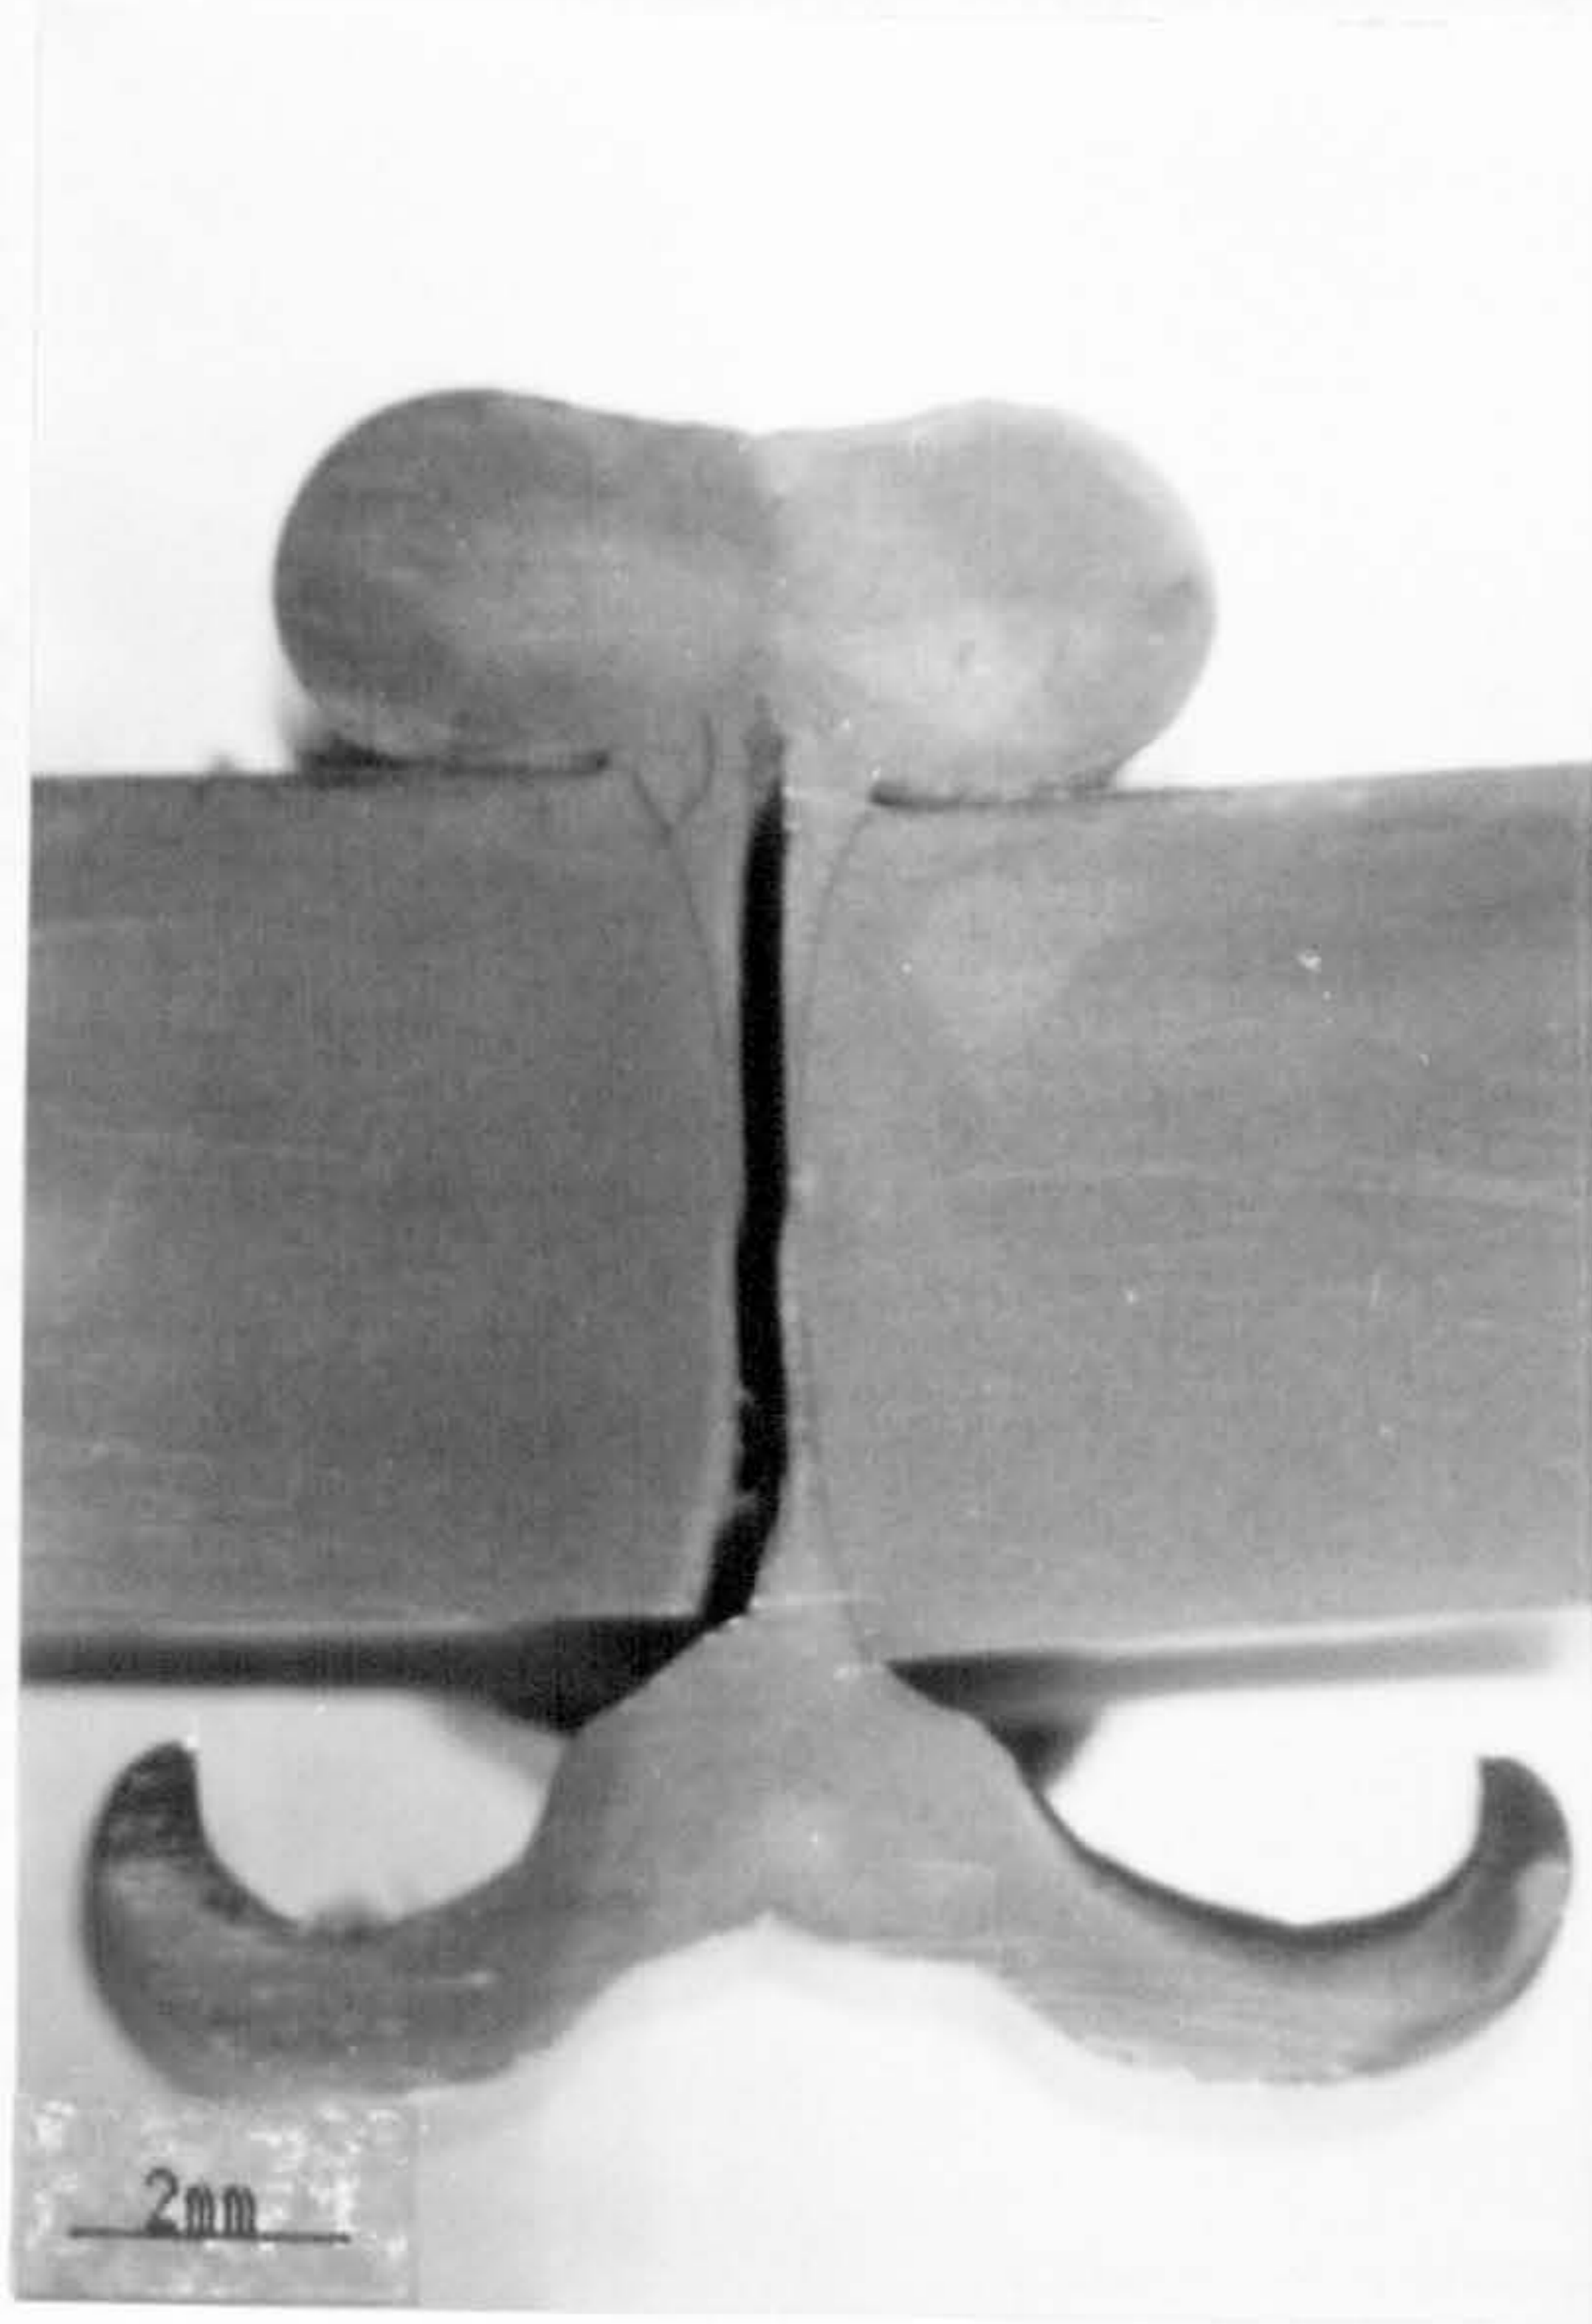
Low magnification optical photomicrograph of the etched surface of a nominally aligned butt weld failure in 63mm SDR11 DuPont Blue Aldyl 322A.
